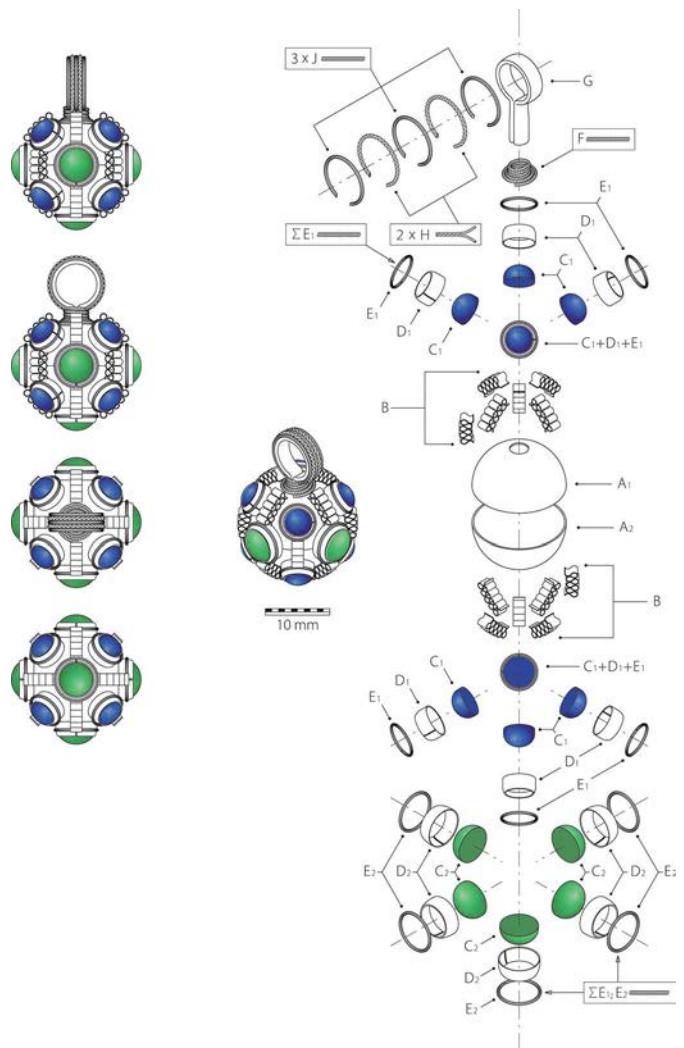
Gombik* 16-14: exploded view of the different components: A₁ upper hemisphere; A₂ lower hemisphere; B corrugated strips; C glass cabochons; D bezels; E ring of block twisted wire; F coil of block twisted wire; G loop; H twisted wires; J block twisted wires (drawing G. Plítková).
